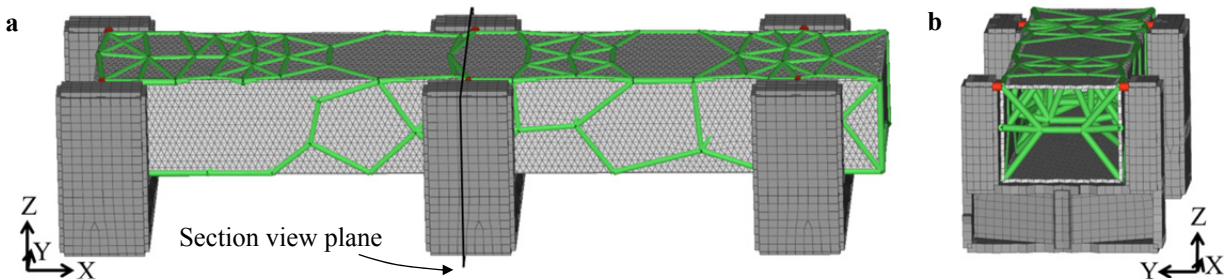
Best bio-inspired lattice girder structure based on connection of neighboring points. (b) shows the section view marked in (a). The shell thickness and beam cross section of the elements are displayed (green: lattice, bright grey: outer surfaces of the girder, dark grey: pedestals, red: beams connecting girder and pedestals).
